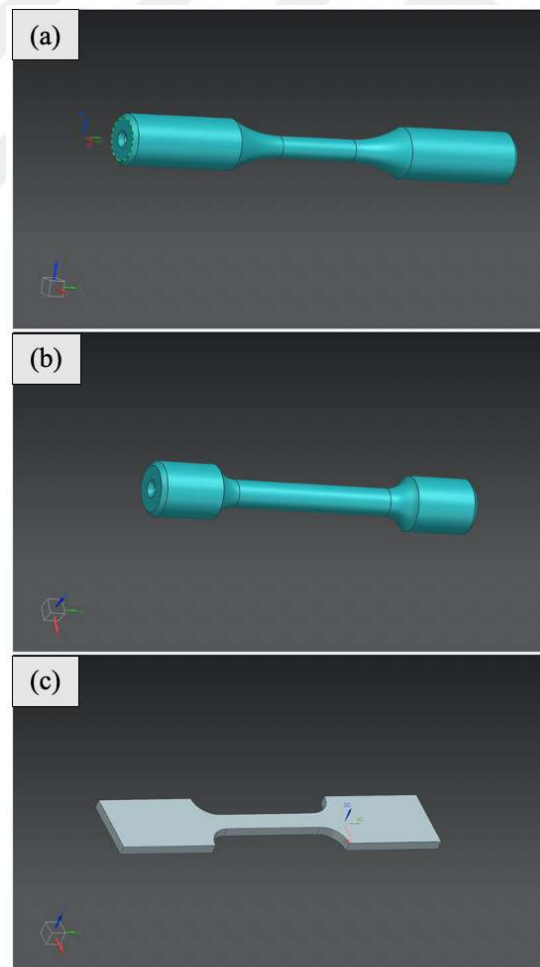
Round test specimen geometry used in fatigue tests (a), round and flat test specimen geometries for the tensile tests (b) and (c)
